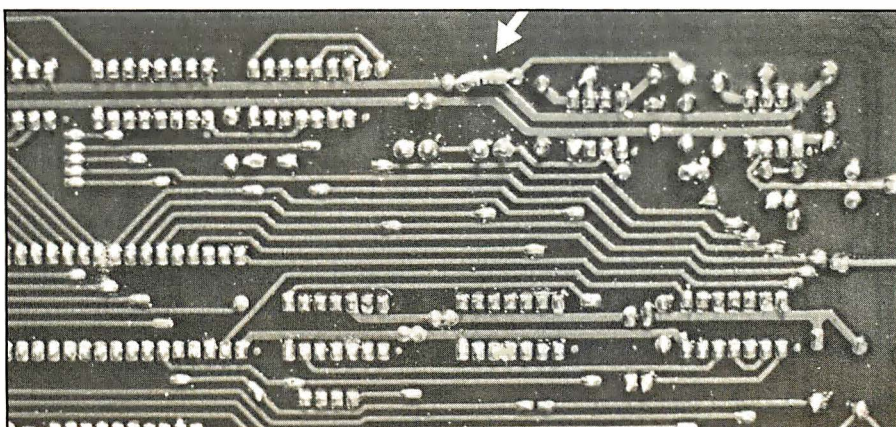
To ensure proper operation of the 6809 processor board, in a modified system, resistor R20 should be installed on the solder side of the board, as shown. It is necessary to trim the leads flush with the top of the board, since they will be covered by the NMI/RESET connector.
